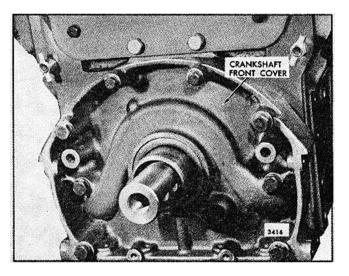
Engine Front Cover Mounting (6V and 8V Engines)
